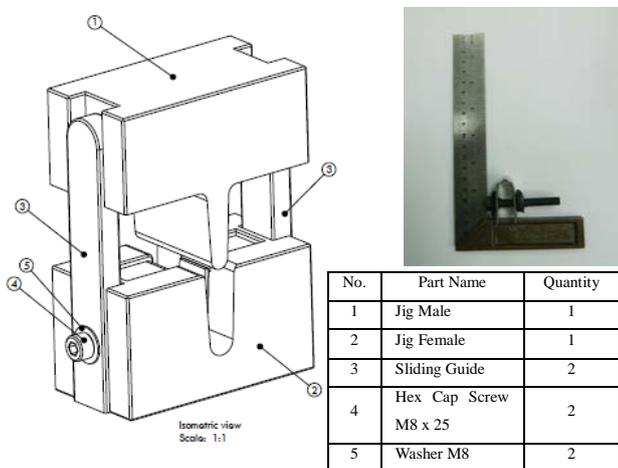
(a) A special bending jigs which were used to stress the cold-rolled samples; and (b) The actual size of the U-bend sample.
